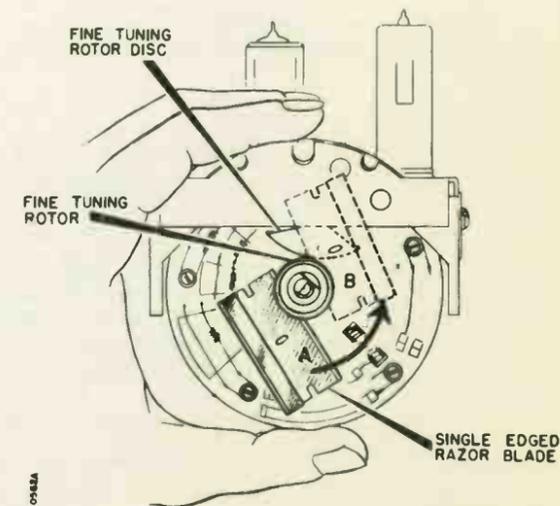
Front View of VHF Tuner Showing Method of Inserting Fine Tuning Disc and Fine Tuning Rotor.
